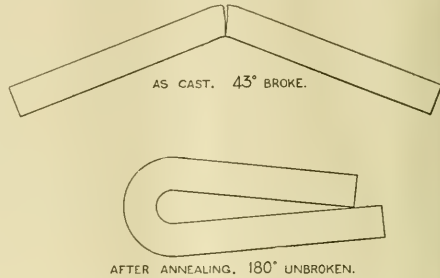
Dimensions of test-pieces 1—10" x $\frac{3}{8}$ " diam.; bending radius, 2".
